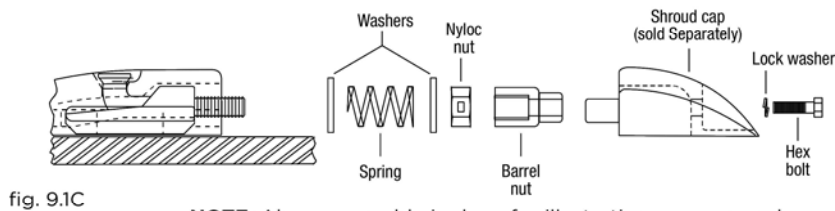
C NOTE: Above assembly is show for illustrative purposes only. Not all assemblies utilize all parts shown.
